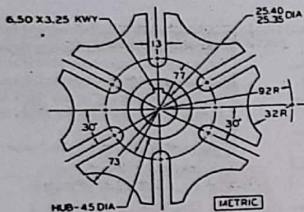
Geneva Cam. Using Layout A-2 or A4-2 (adjusted), draw in pencil. Omit dimensions and notes.
